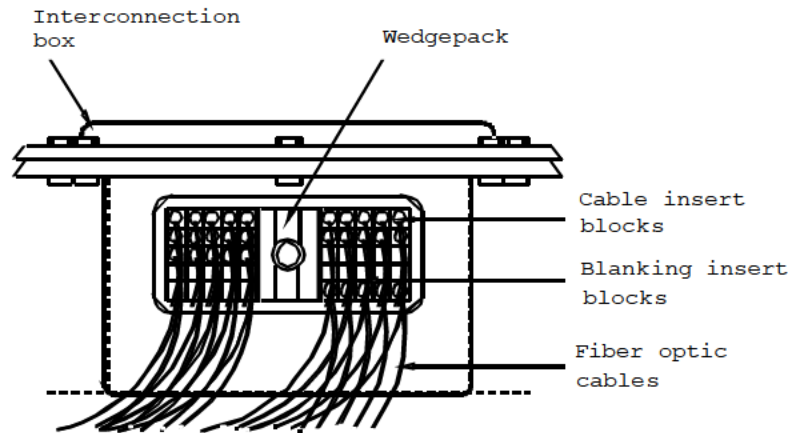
B2-1. Interconnection box integral MCP – typical.
